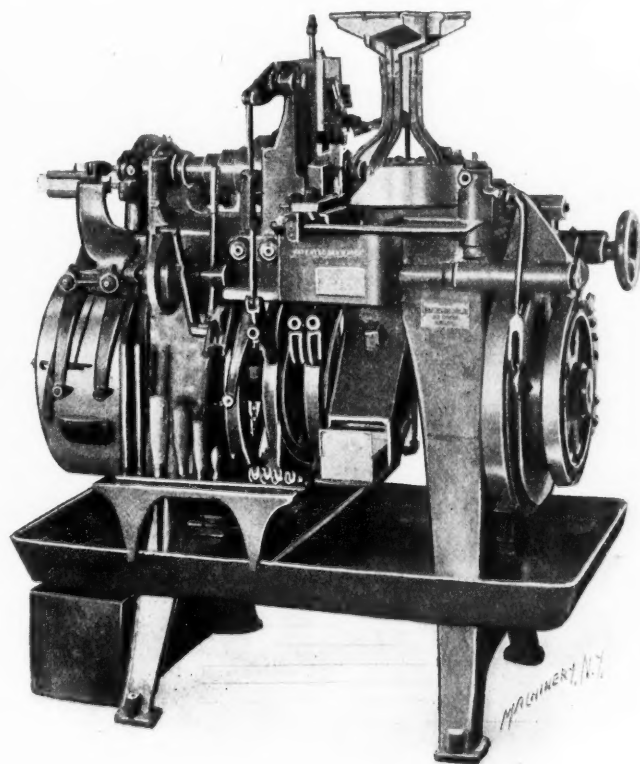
Davenport Automatic Machine for Assembling and Turning "Lantern" Pinions
